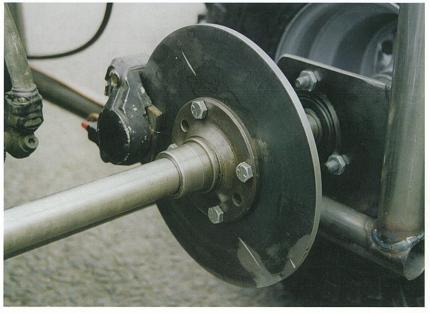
I made the caliper mounting bracket from two pieces of 5mm plate welded to an off-cut of the 38mm frame tube. This was then welded to frame tube B. (Steve Williams)
